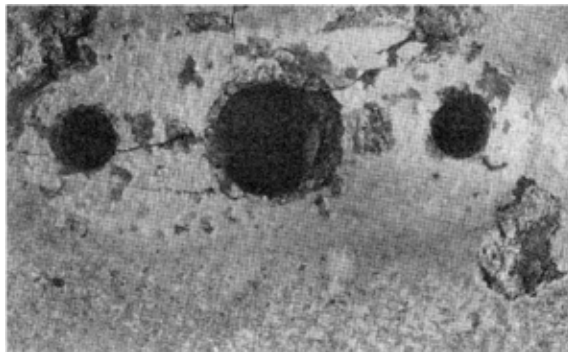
A macro lens view revealing cracks and corrosion pitting on a casting.
